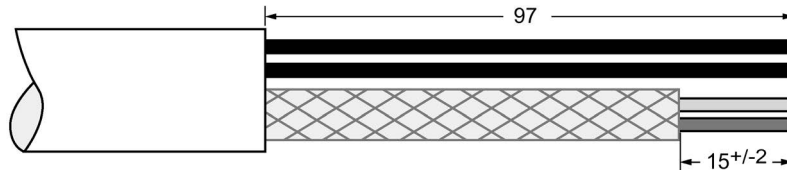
Stripping dimensions for PROFIBUS Hybrid cables
